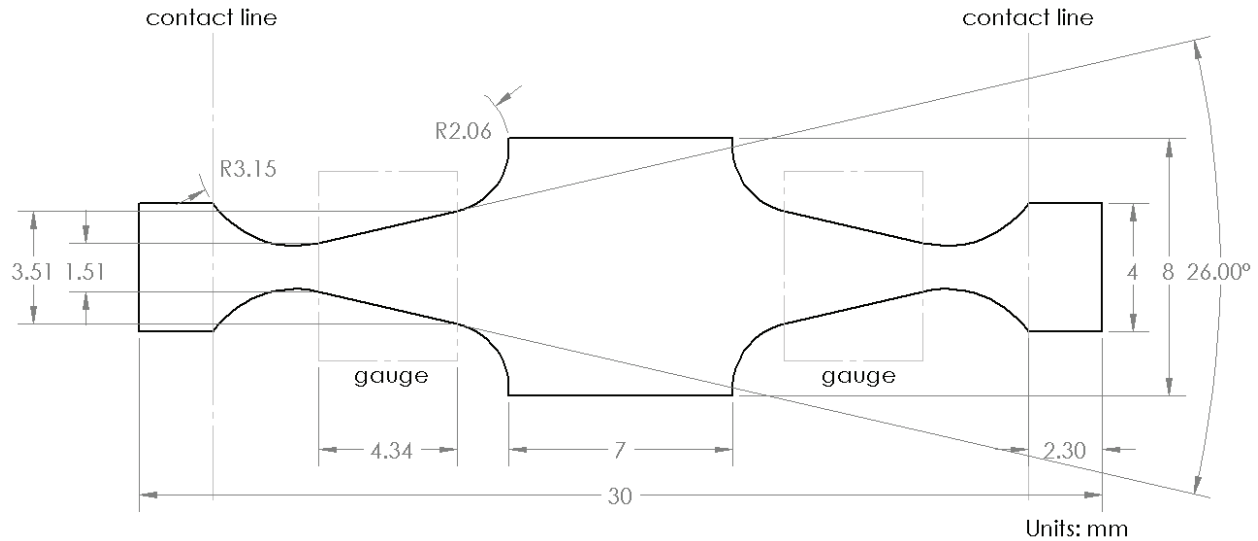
Drawing of the wedge-shaped Krouse type mini specimen showing the dual gauge section, and contact line at both ends for simply supported loading
